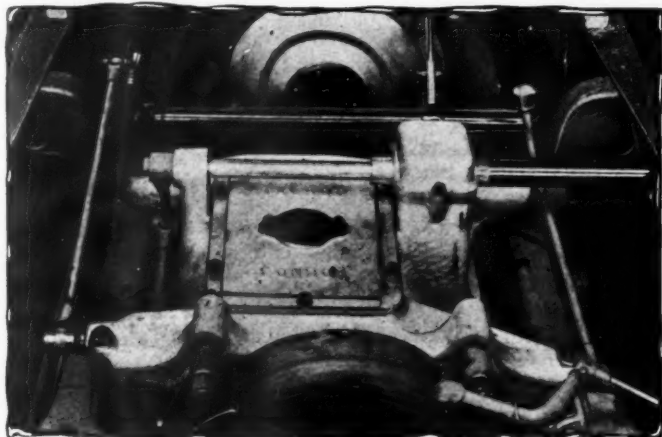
Talbot gear box and brake mounting with long spiral back-spring
